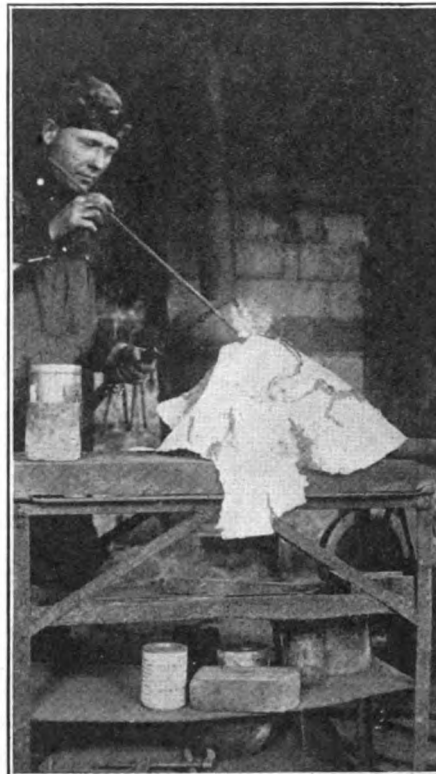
COVERING THE GEAR TO CONFINE THE HEAT
